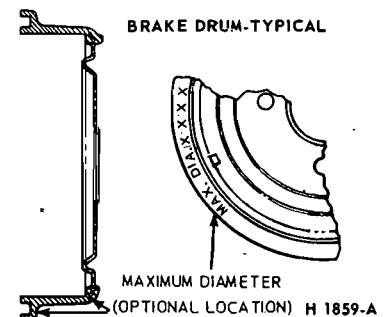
Brake Drum Maximum Inside Diameter Marking Location
